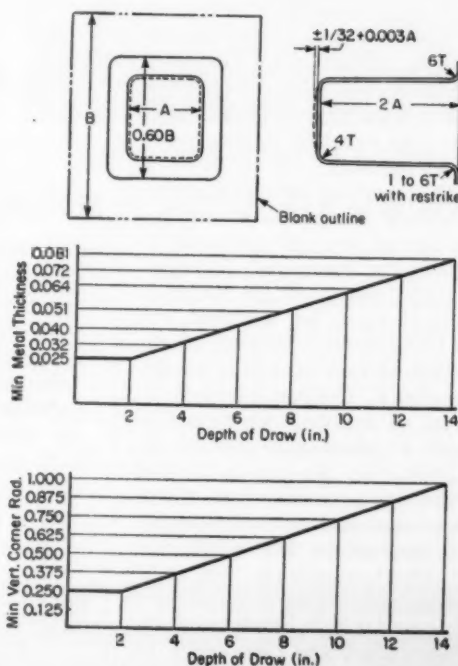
Suggested design factors for deep-drawn magnesium parts
